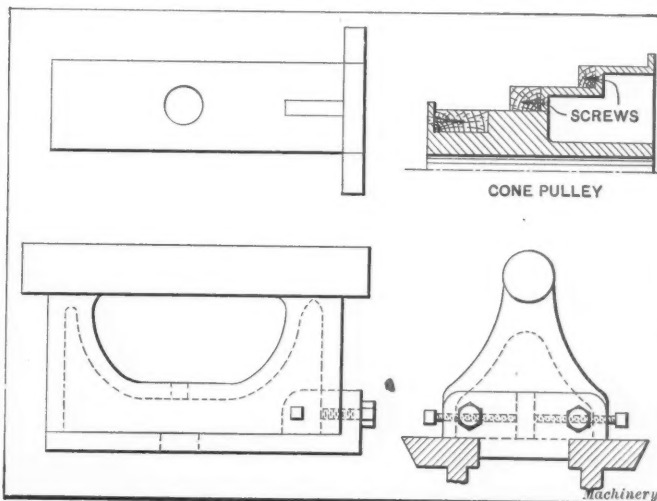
Tailstock Adjustment and Cone Pulley after Improvement
